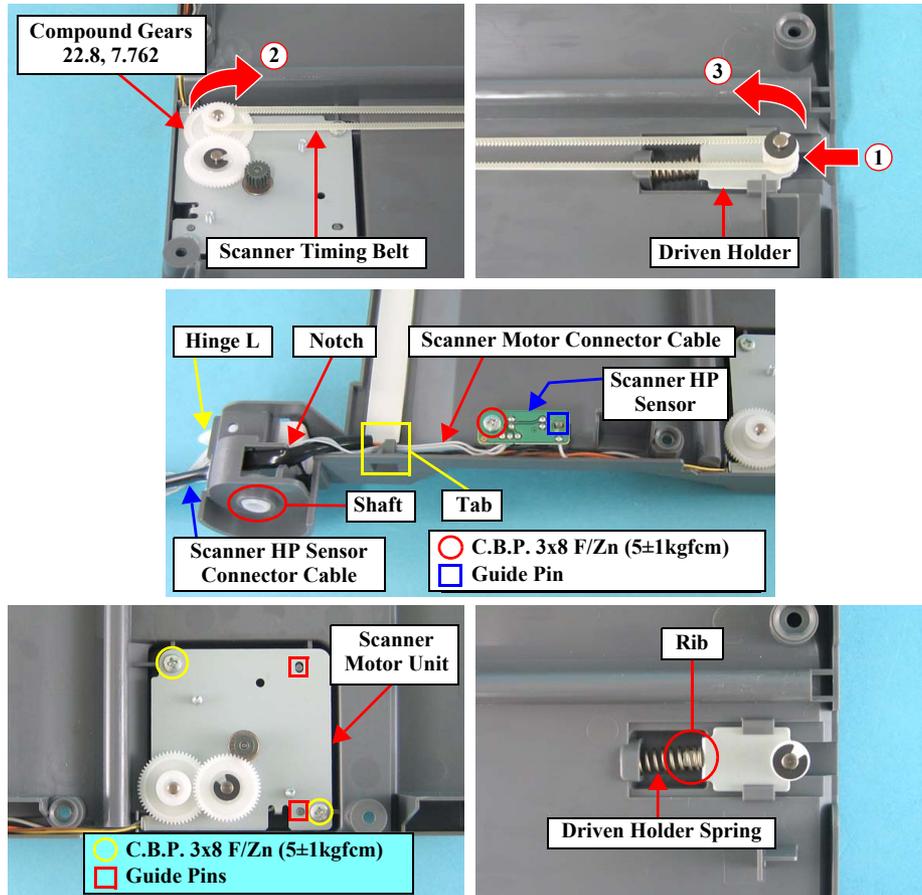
Removing Scanner Motor Unit/Scanner HP Sensor/Driven Holder
